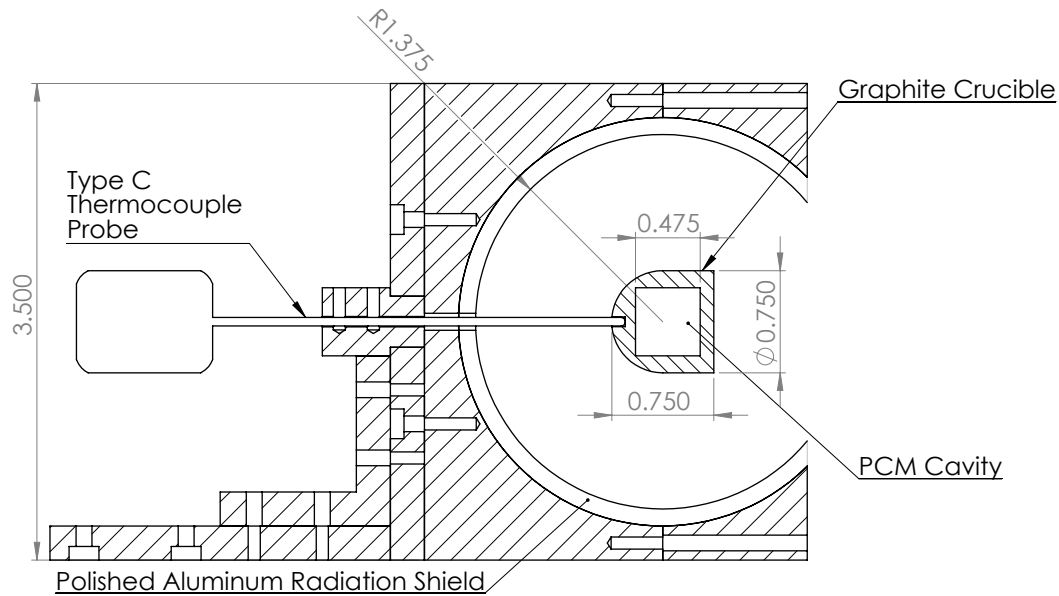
2-D cutaway schematic of the initial solar furnace test assembly showing the spherical radiation shield, support structure, thermocouple sting mount and “bullet” style crucible. Note that for pure graphite tests, the PCM cavity was removed and the thermocouple was placed in the center of the test section. Dimensions given in inches.
